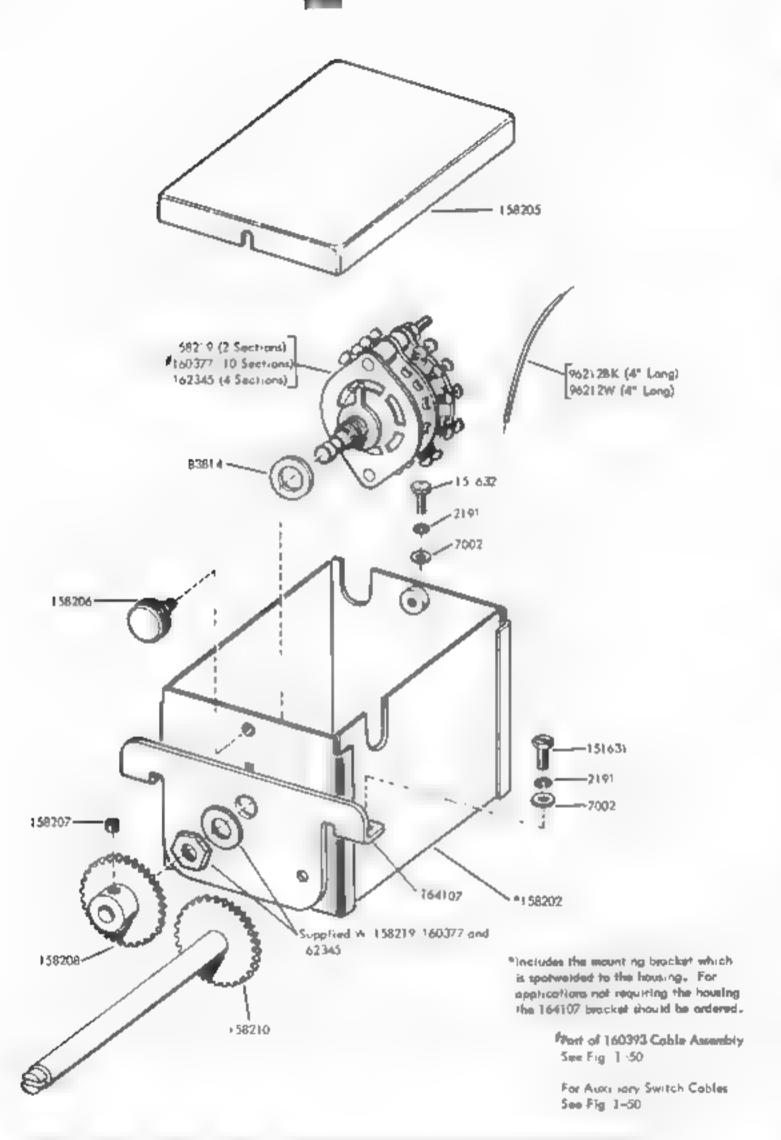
158220, 159871 AND 162342 AUXILIARY SWITCH MECHANISM
